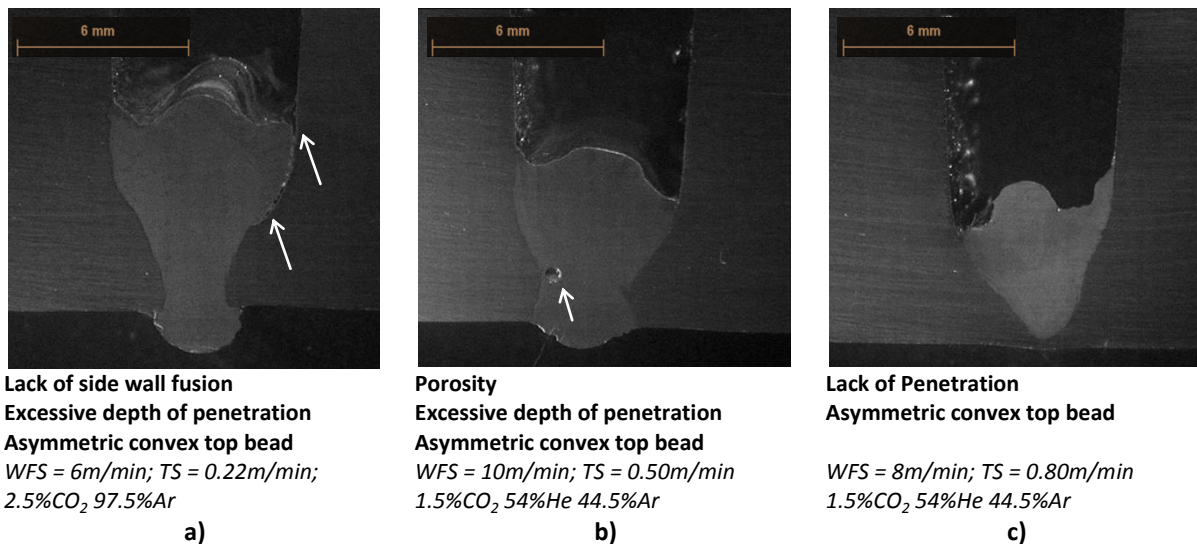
Macrostructures illustrating defects on welding of narrow groove pipe using GMAW-P.
